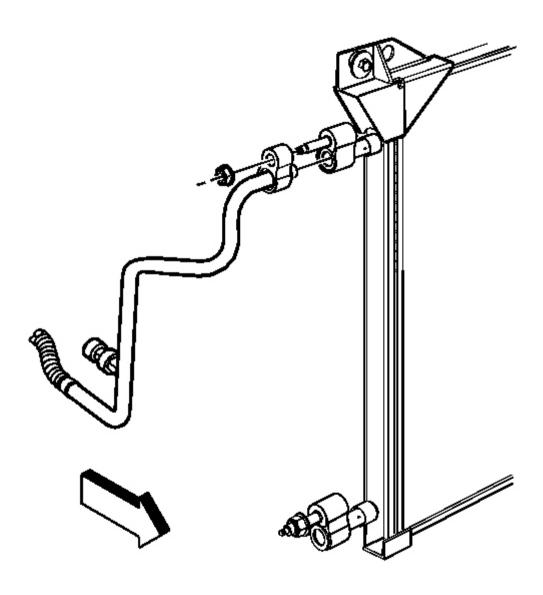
A/C Refrigerant Pressure Sensor & Evaporator Tube Courtesy of GENERAL MOTORS CORP.
